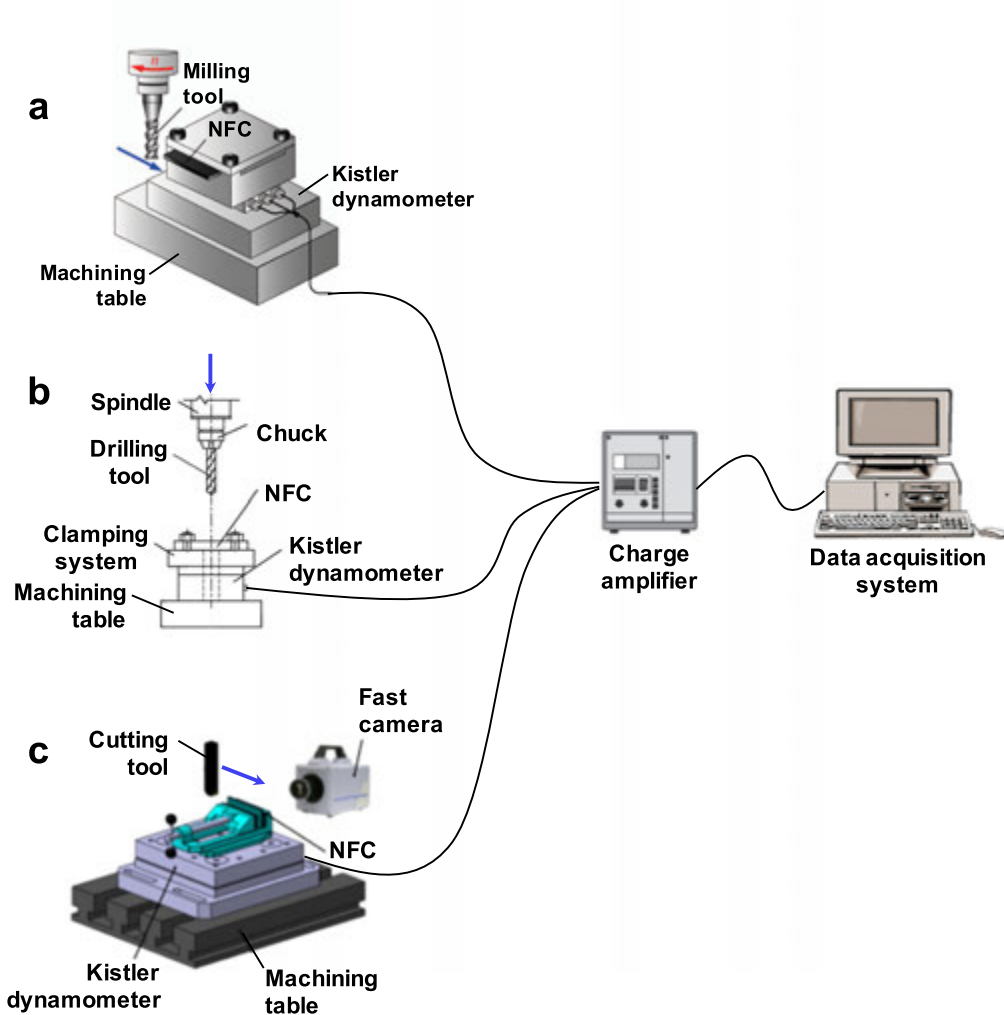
Schematic illustration of the experimental machining setup. (a) milling, (b) drilling, and (c) orthogonal cutting.
